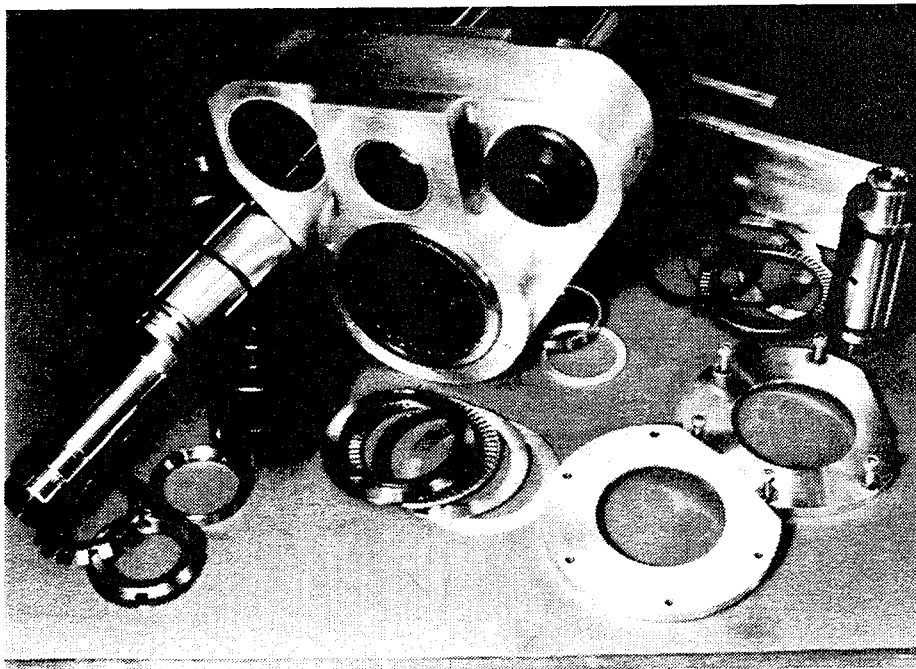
ROSS YOKE, CRANKSHAFT, BEARING, AND VARIOUS COMPONENTS
